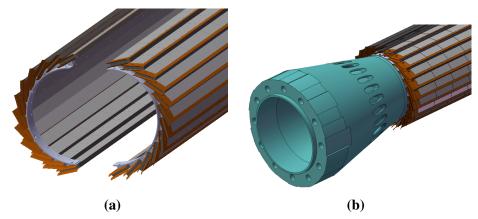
(a) The barrel assembly. (b) The barrel on beam pipe assembly (the outer tube of the beam pipe assembly is not shown)
